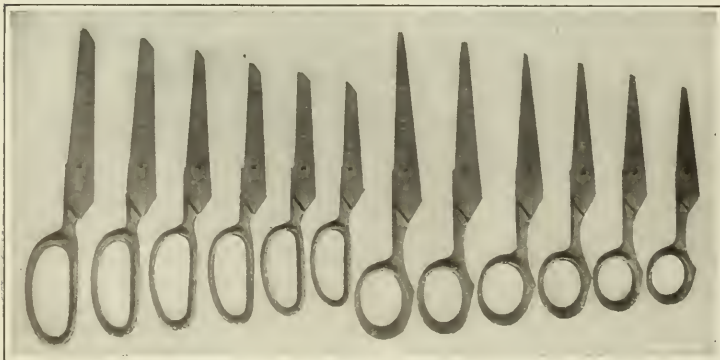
Scissor Forgings made in Dies cut on Reducing Machine from Two Models
